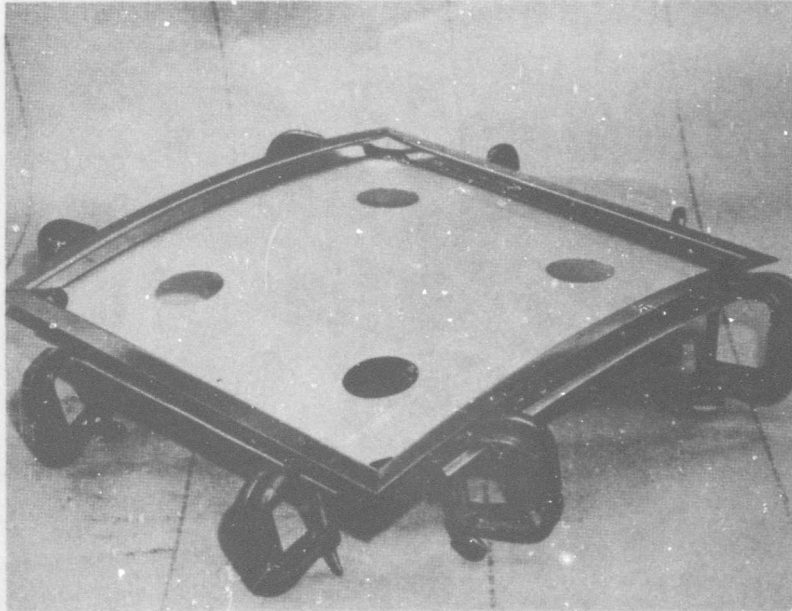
ALIGNMENT OF EDGEMEMBERS FOR WELDING (CURVED)
